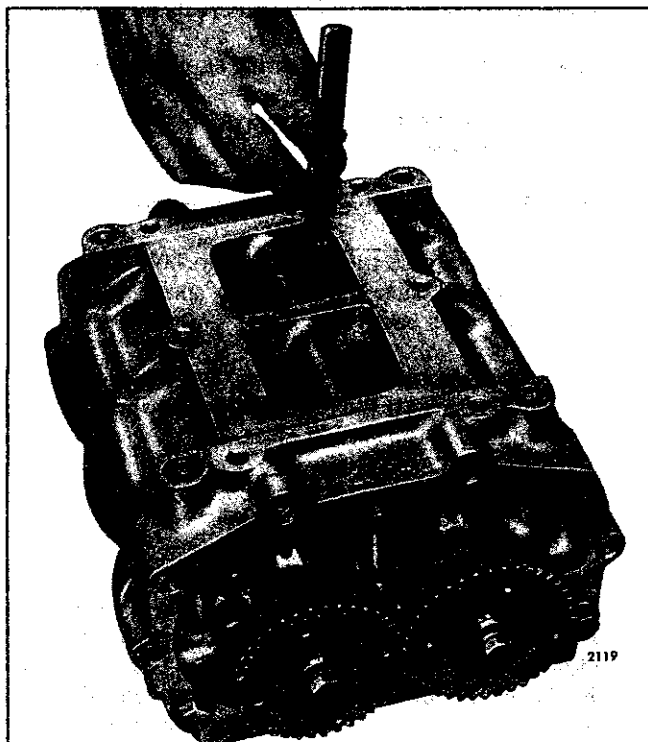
Measuring Rotor Lobe to End Plate Clearance
